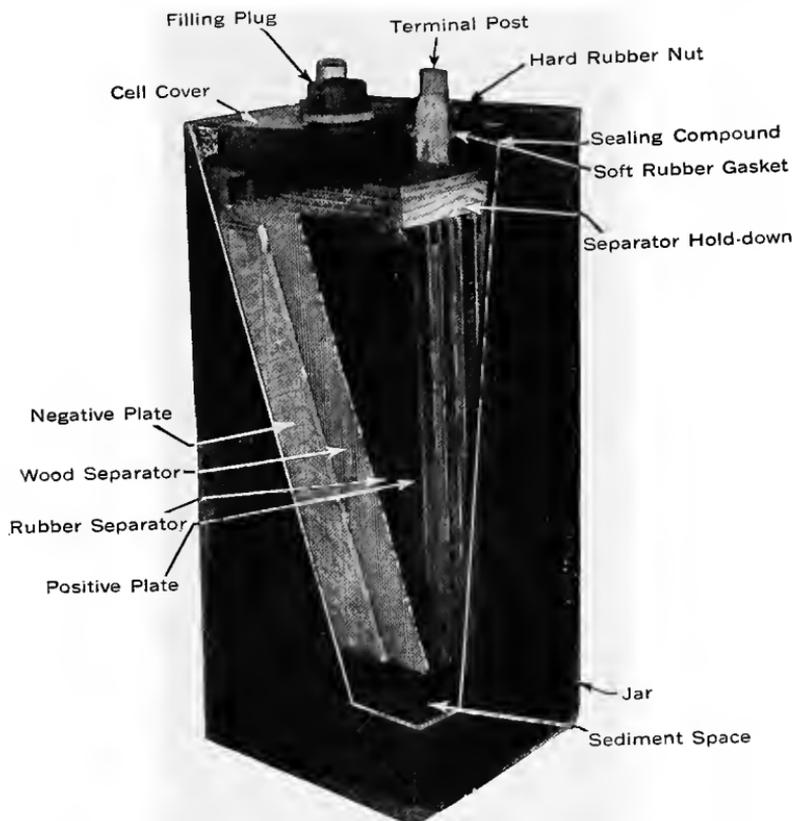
Sectional View of "Diamond Grid" Cell, Showing Details of Cell Cover.
